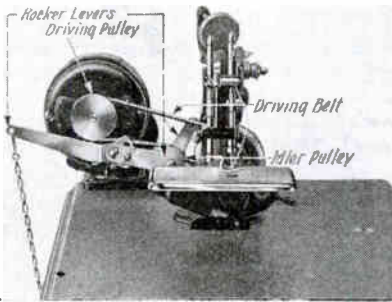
End View of Form K Motor Attached to Low Arm Machine
